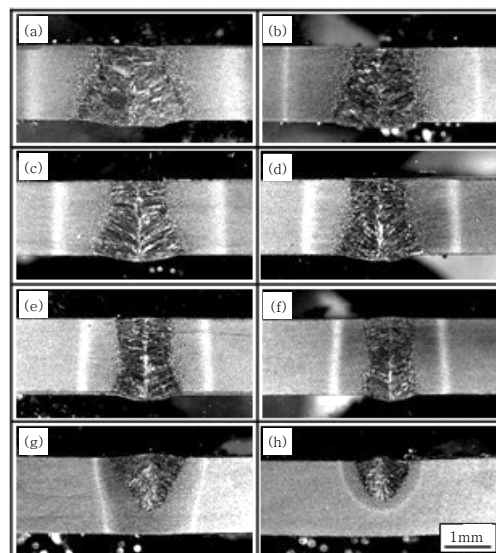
Representative cross-sections of bead with welding speed: (a)1.5m/min, (b)1.8m/min, (c)2.1m/min, (d)2.4m/min, (e)3.0m/min, (f)3.6m/min, (g)4.5m/min, (h)5.4m/min
